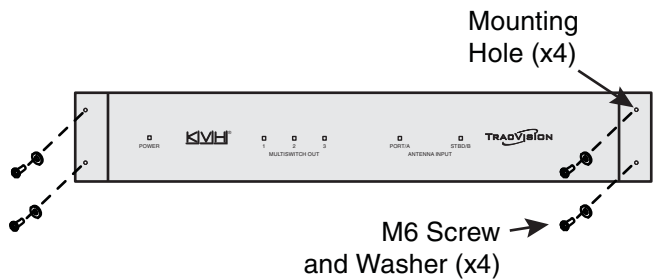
SmartSwitch Rack Mounting Bracket Removal
